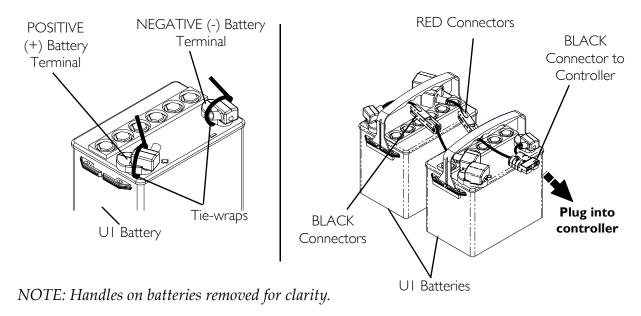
Disconnecting/Connecting Battery Cables
